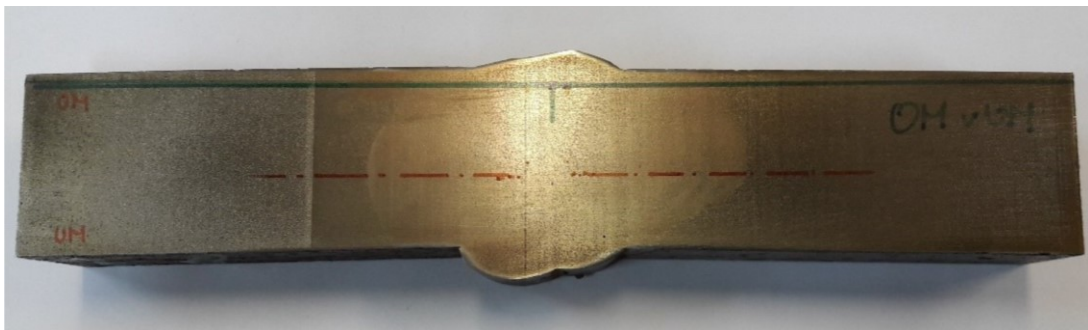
The example of marked position of the notch in the double mismatched OM-UM weld before fabrication of the SE(B) specimen. the weld has been exposed by etching with 2 % solution of nitric acid and alcohol.
